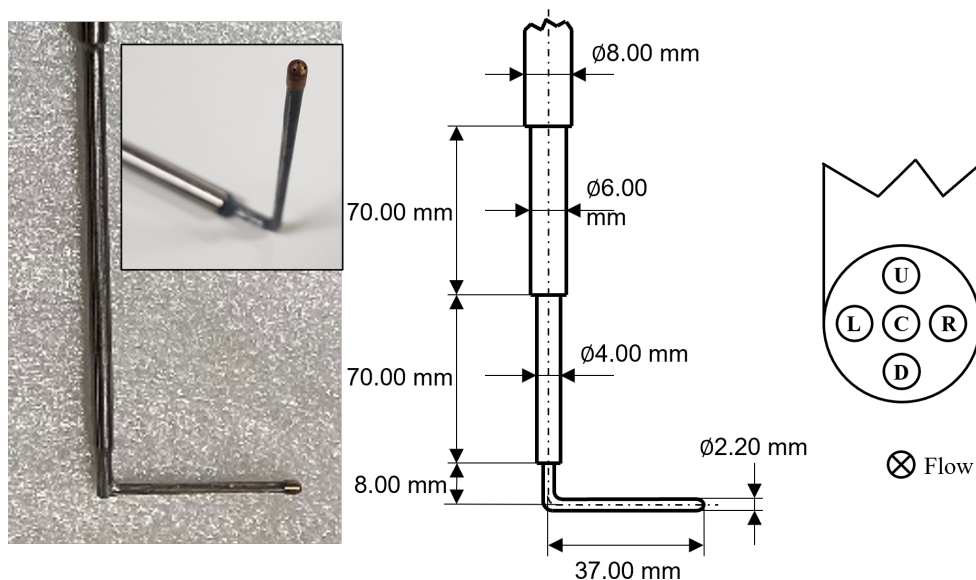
L-shaped five-hole probe geometry and dimensions.
